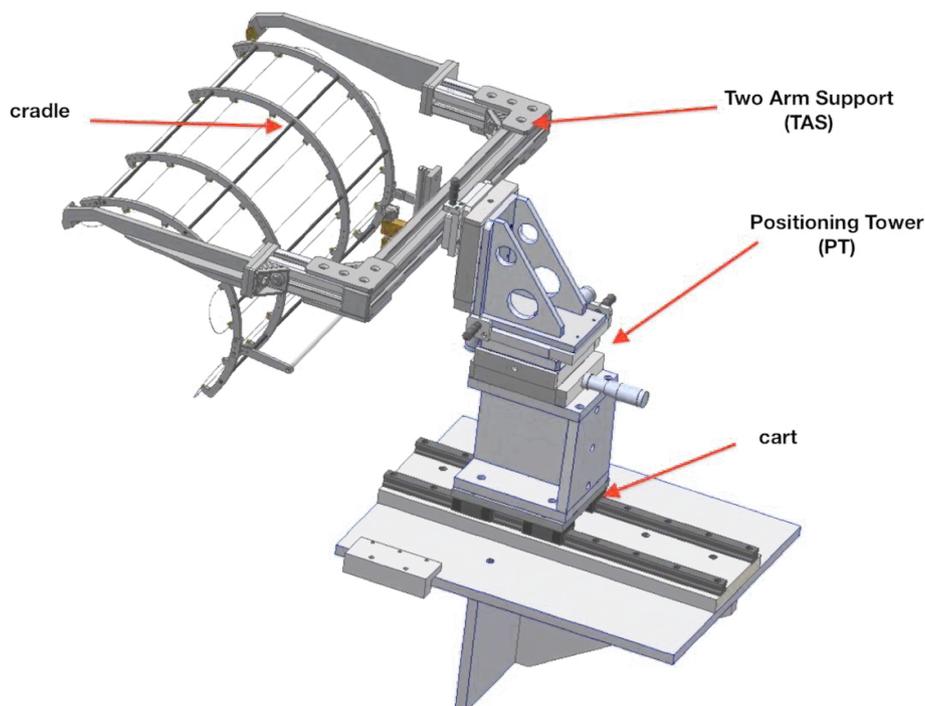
Drawing of the mechanical system used to mount the cooling pipes.
